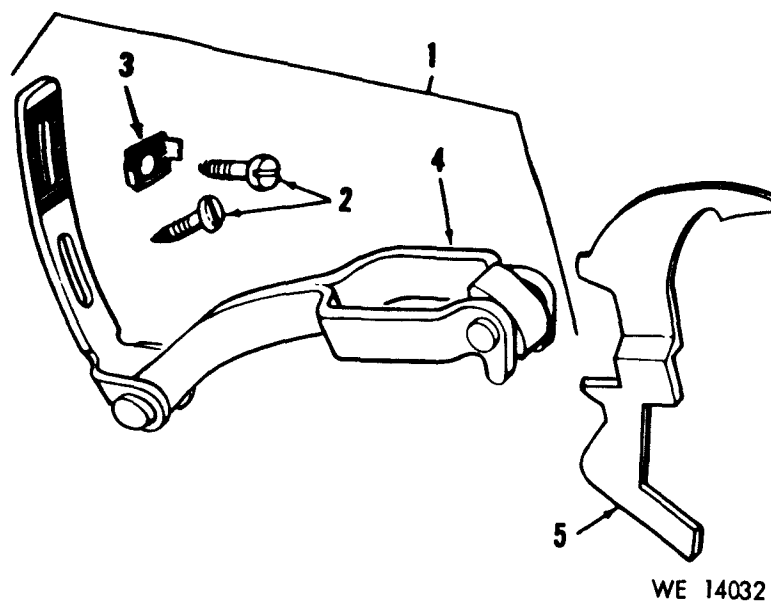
Winter trigger kit - M14 Rifle - exploded view.
